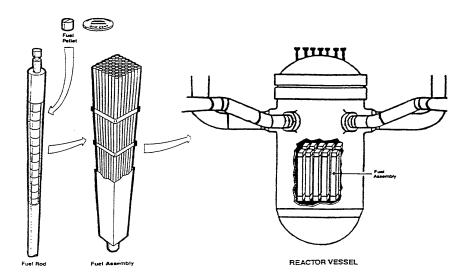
The reactor core at Davis-Besse contains 177 fuel assemblies. Each assembly contains 208 fuel rods. Each fuel rod is filled with approximately five pounds of fuel pellets. Each pellet is approximately 3/8 inch diameter and 5/8 inch long.
